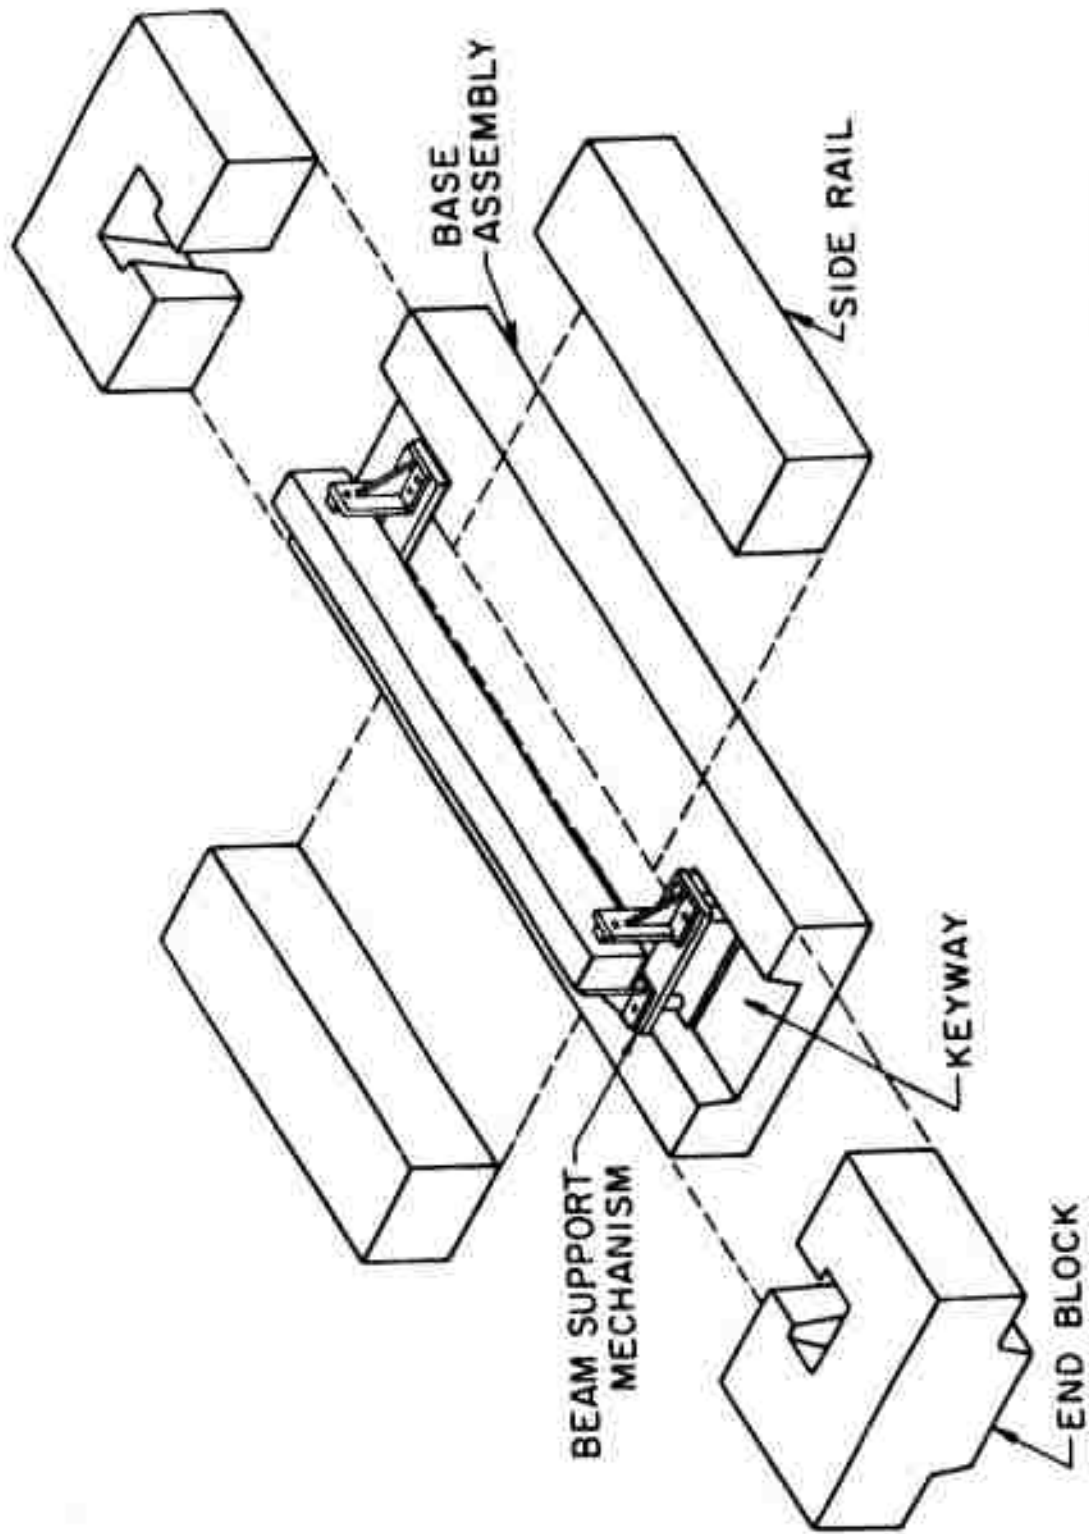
Test Fixture With Beam Installed on Support Mechanisms
